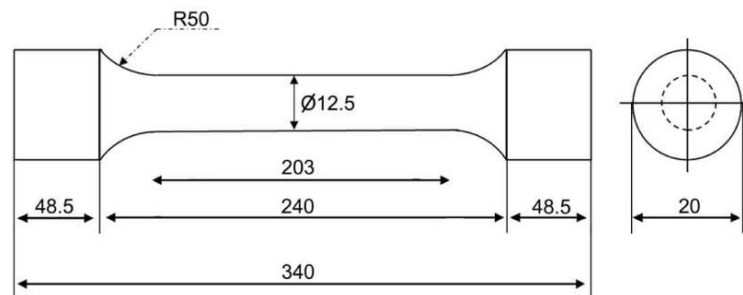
Tensile test specimen geometry. All dimensions are in mm.
